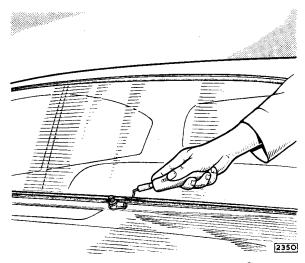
Lapping the sealing rubber over the chrome strip with the special tool ("A" Fig. 14).
